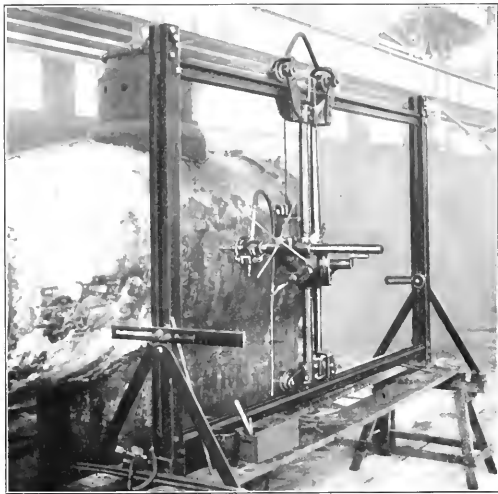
Arrangement for Holding Air Motors for Drilling Boilers
